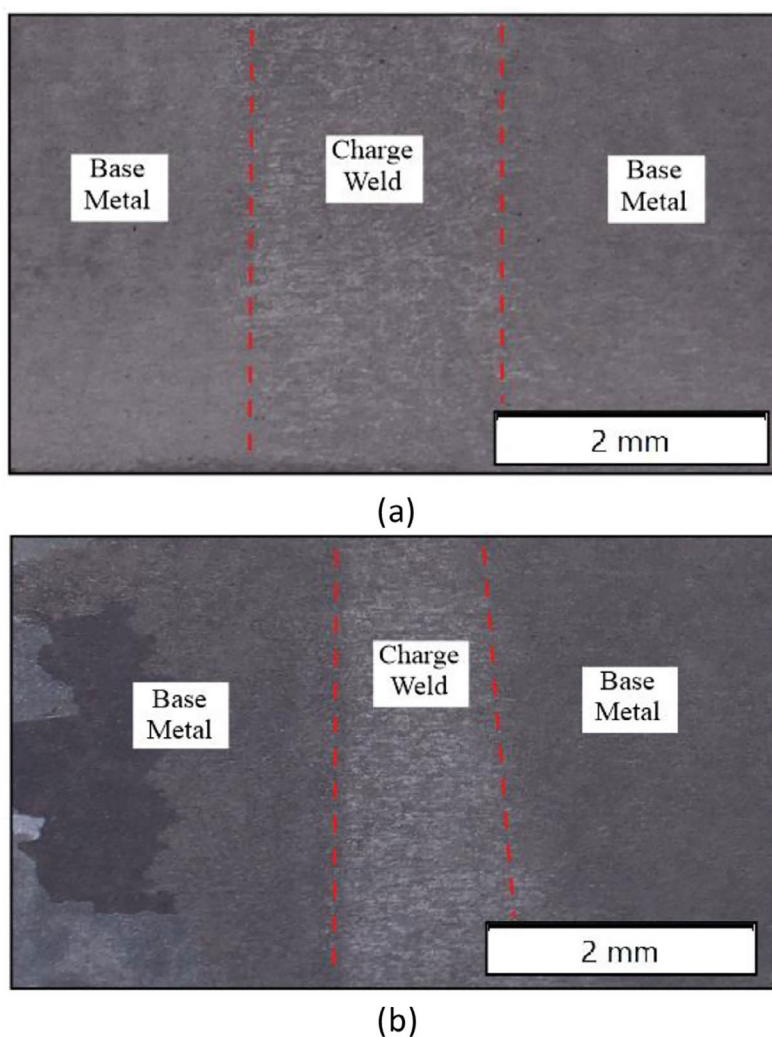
Macrostructure of panels with charge weld: (a) T0 and (b) T500
